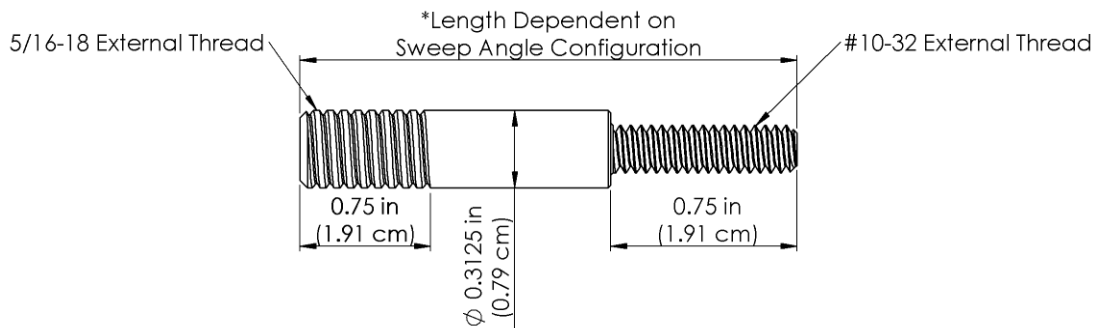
Representative Drawing of the Secondary Support Rod Extensions.
